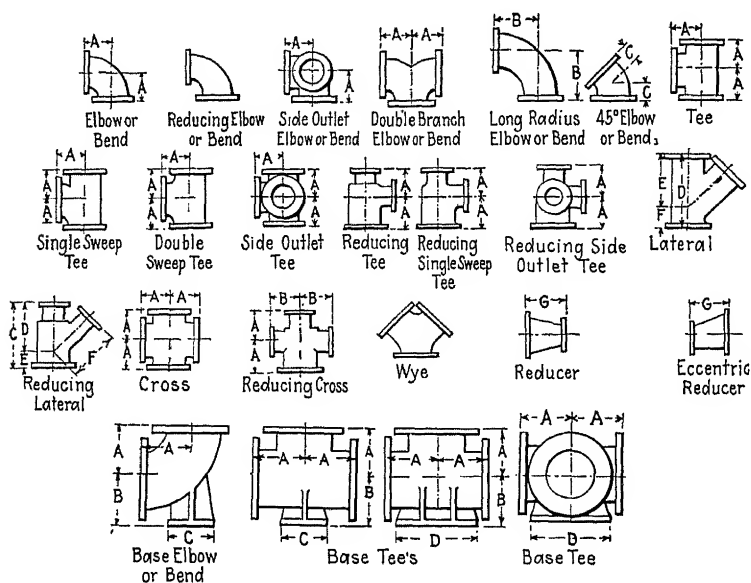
American Standard fittings, flanged, for cast-iron pipe.
